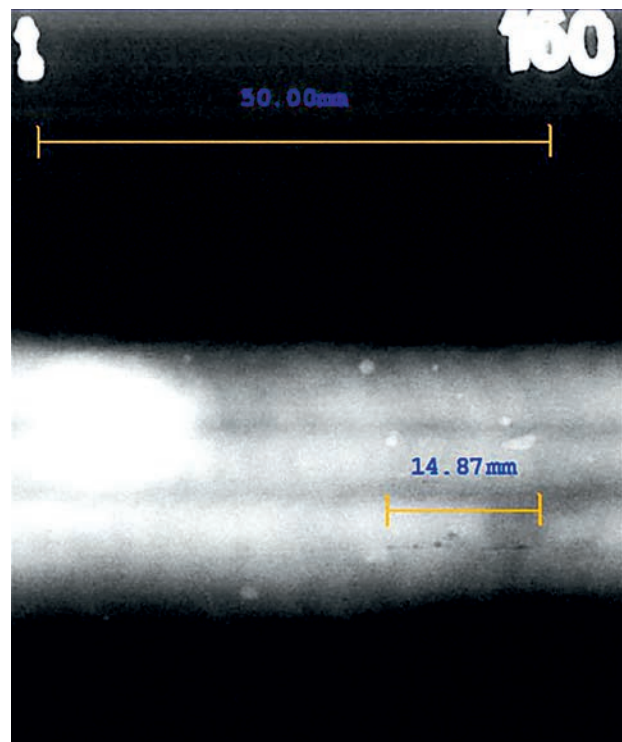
Digital radiograph of W2 weld. An example of cluster porosity (2013) dimensioning.
